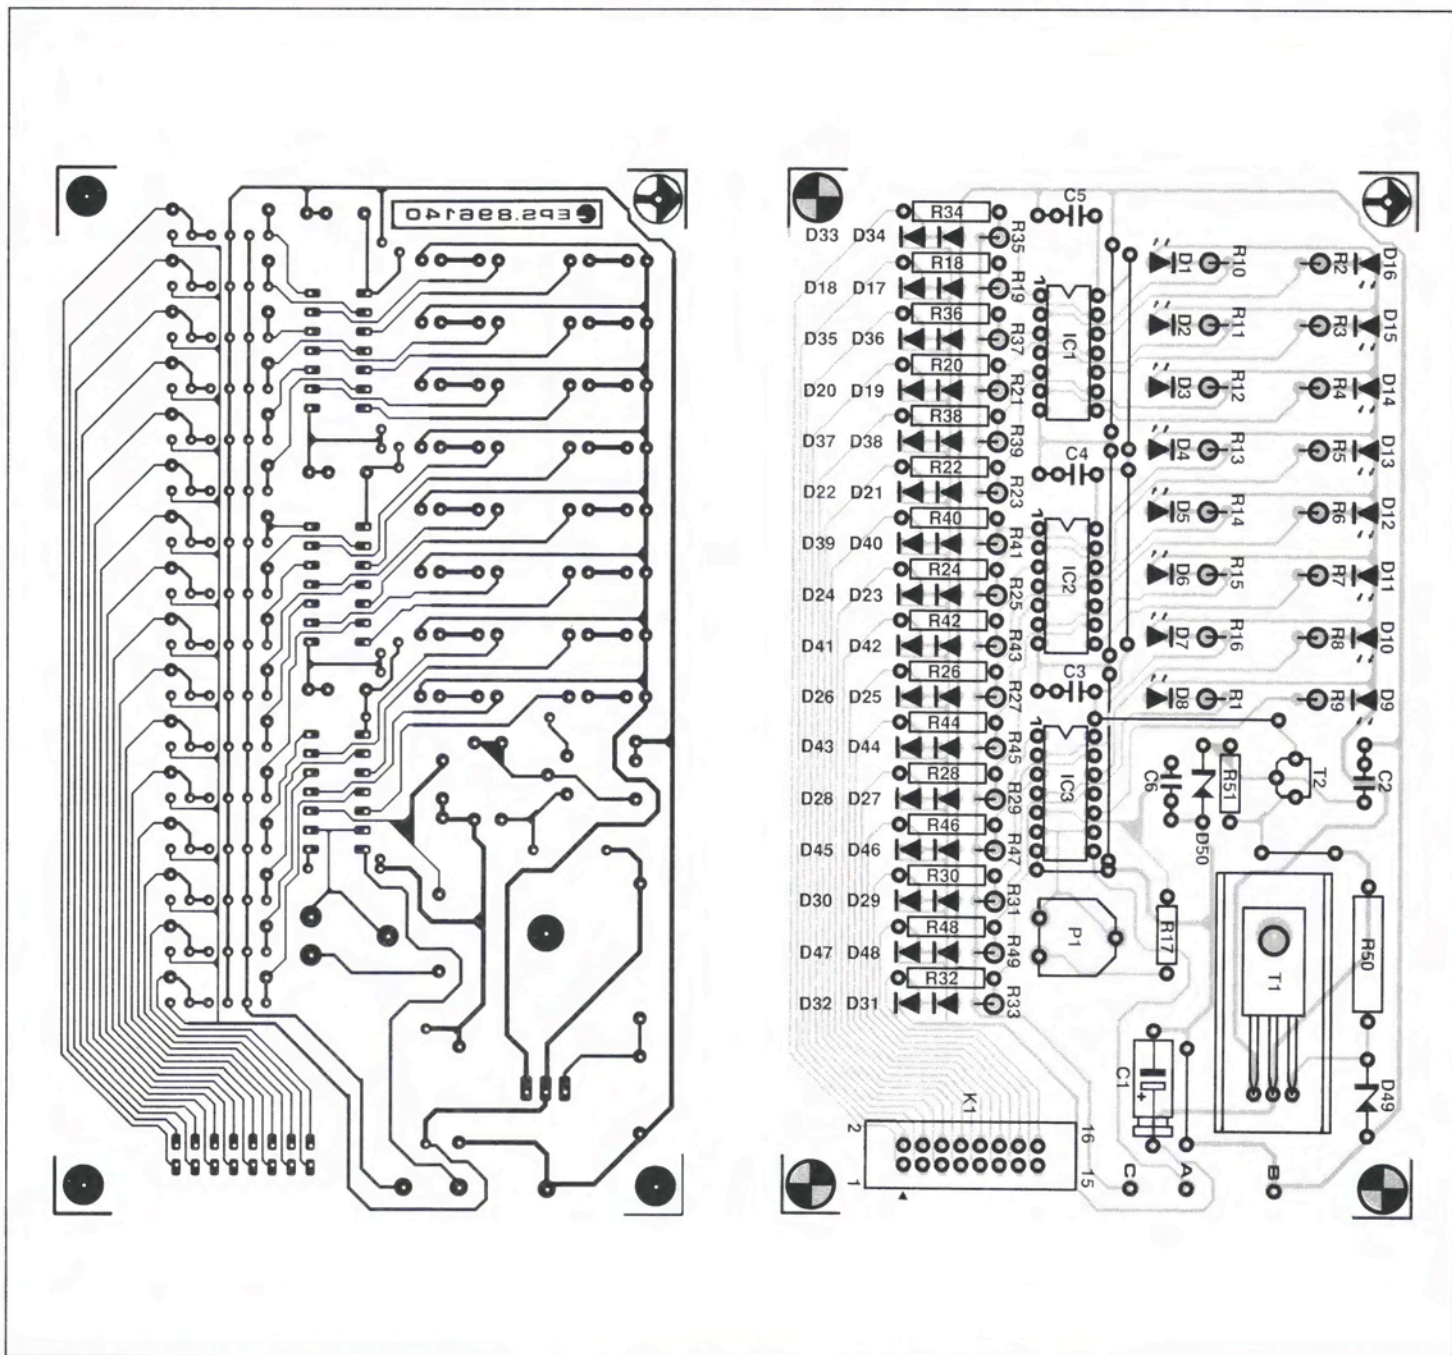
Track lay-out (reflected) and component mounting plan of the printed-circuit board for the IC tester.
